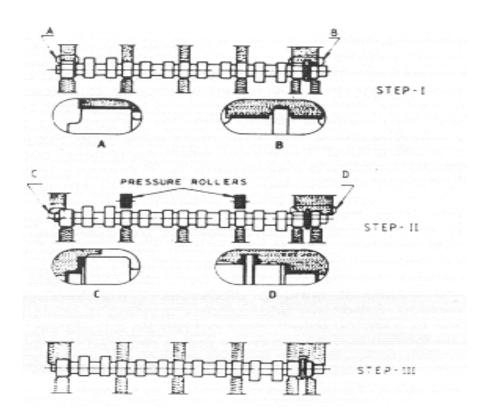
3- Step Centerless Grinding of Camshaft.
